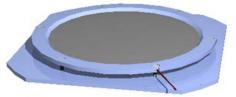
Assembly of MCP stack – Stage 3-3 (DET120 & DET120P)
